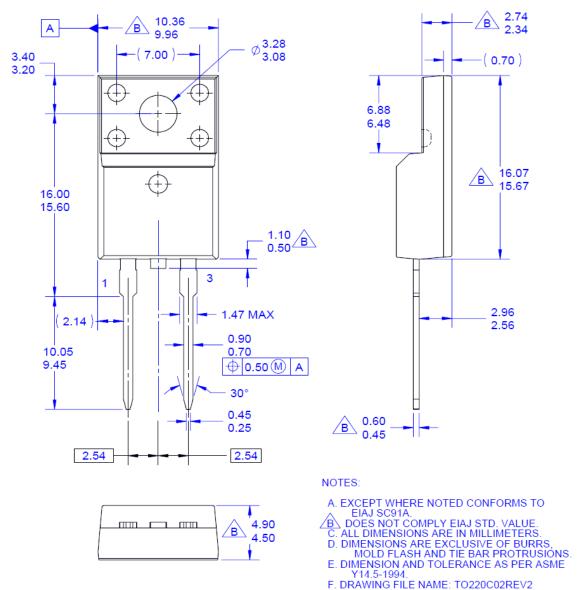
TO-220F 2L - 2LD; TO220; MOLDED; FULL PACK
